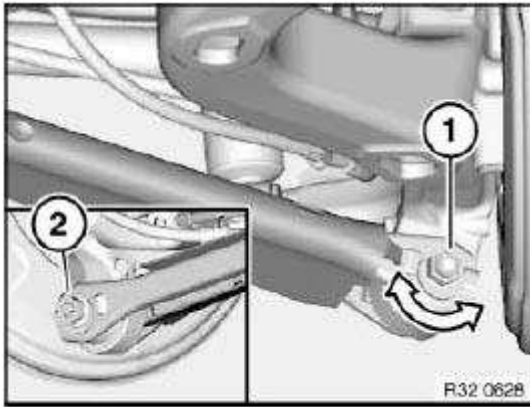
Turning Eccentric Bolt To Adjust Camber
